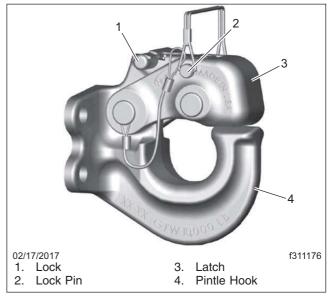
, Holland Trailer Coupling with Lock Pin
